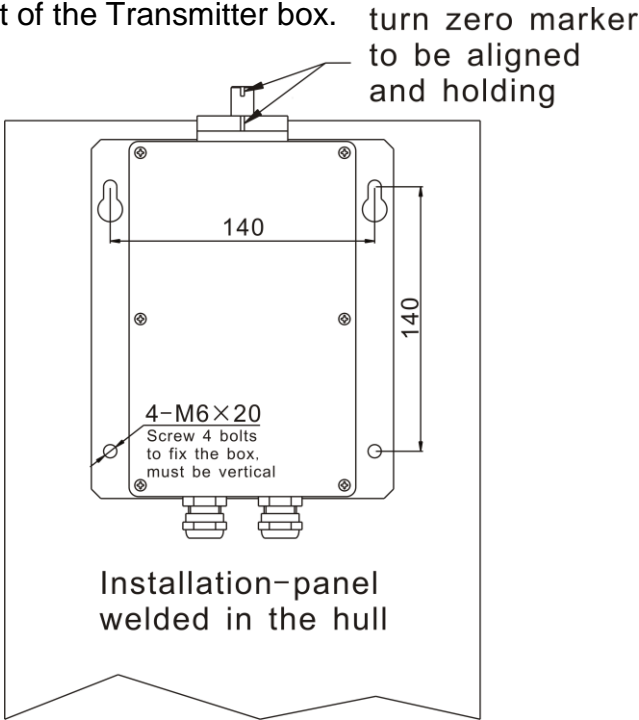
Installation of Rudder Angle Transmitter AD803-2
